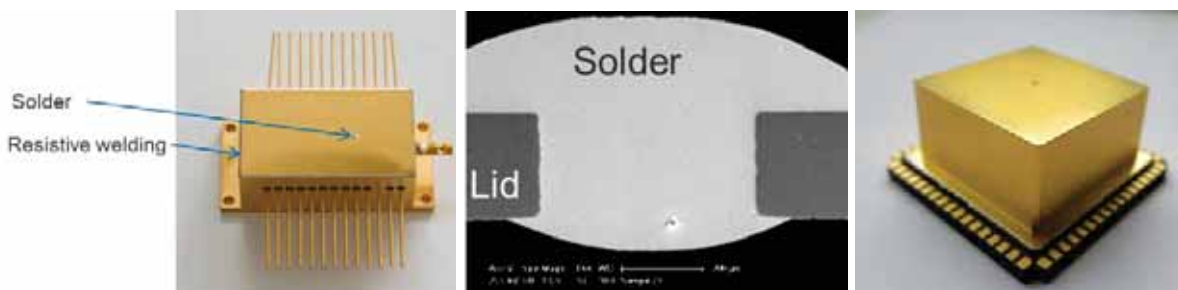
A sample sealed using resistive welding and laser soldering (left); cross section of a laser soldered area (middle); resistive soldered ceramic package used for atomic clock sealing (right) with a leak rate of $<3E-10$ mbar-l/s
